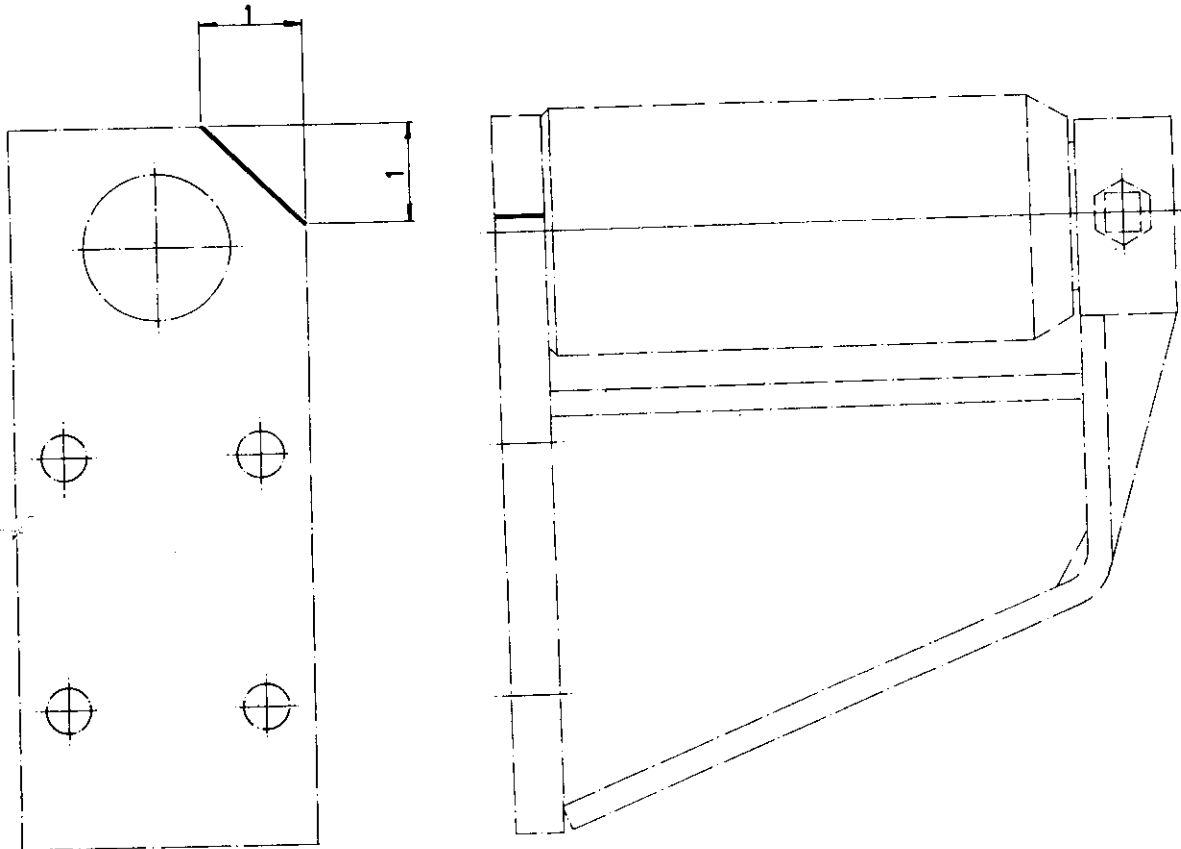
VERTICAL FAIRLEADS ASSEMBLY
